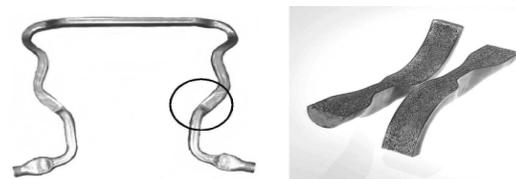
Motor carrier made by hydro forming filled in weakest sections with aluminium foam
